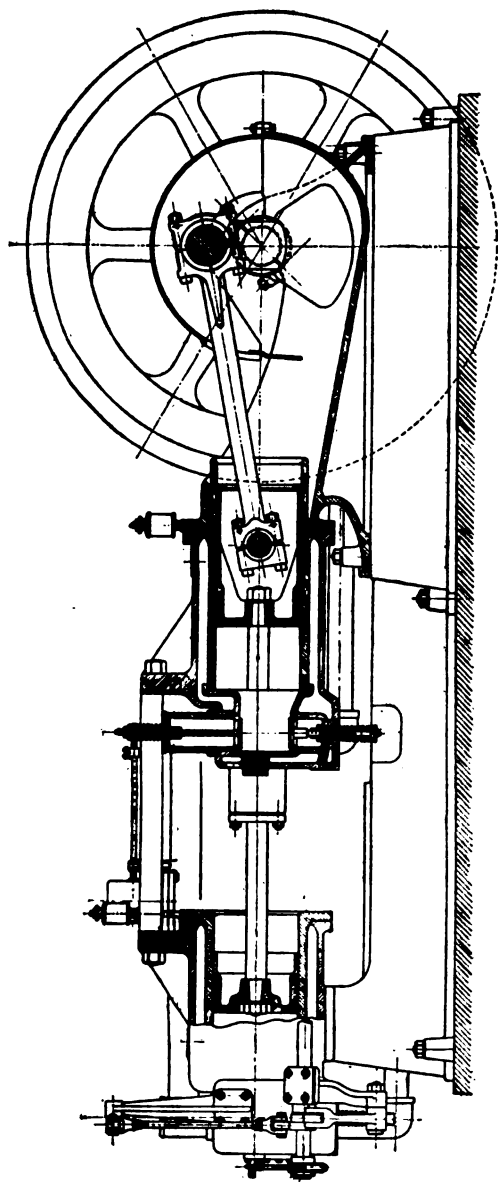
Jacobson Tandem Throttling Engine.
